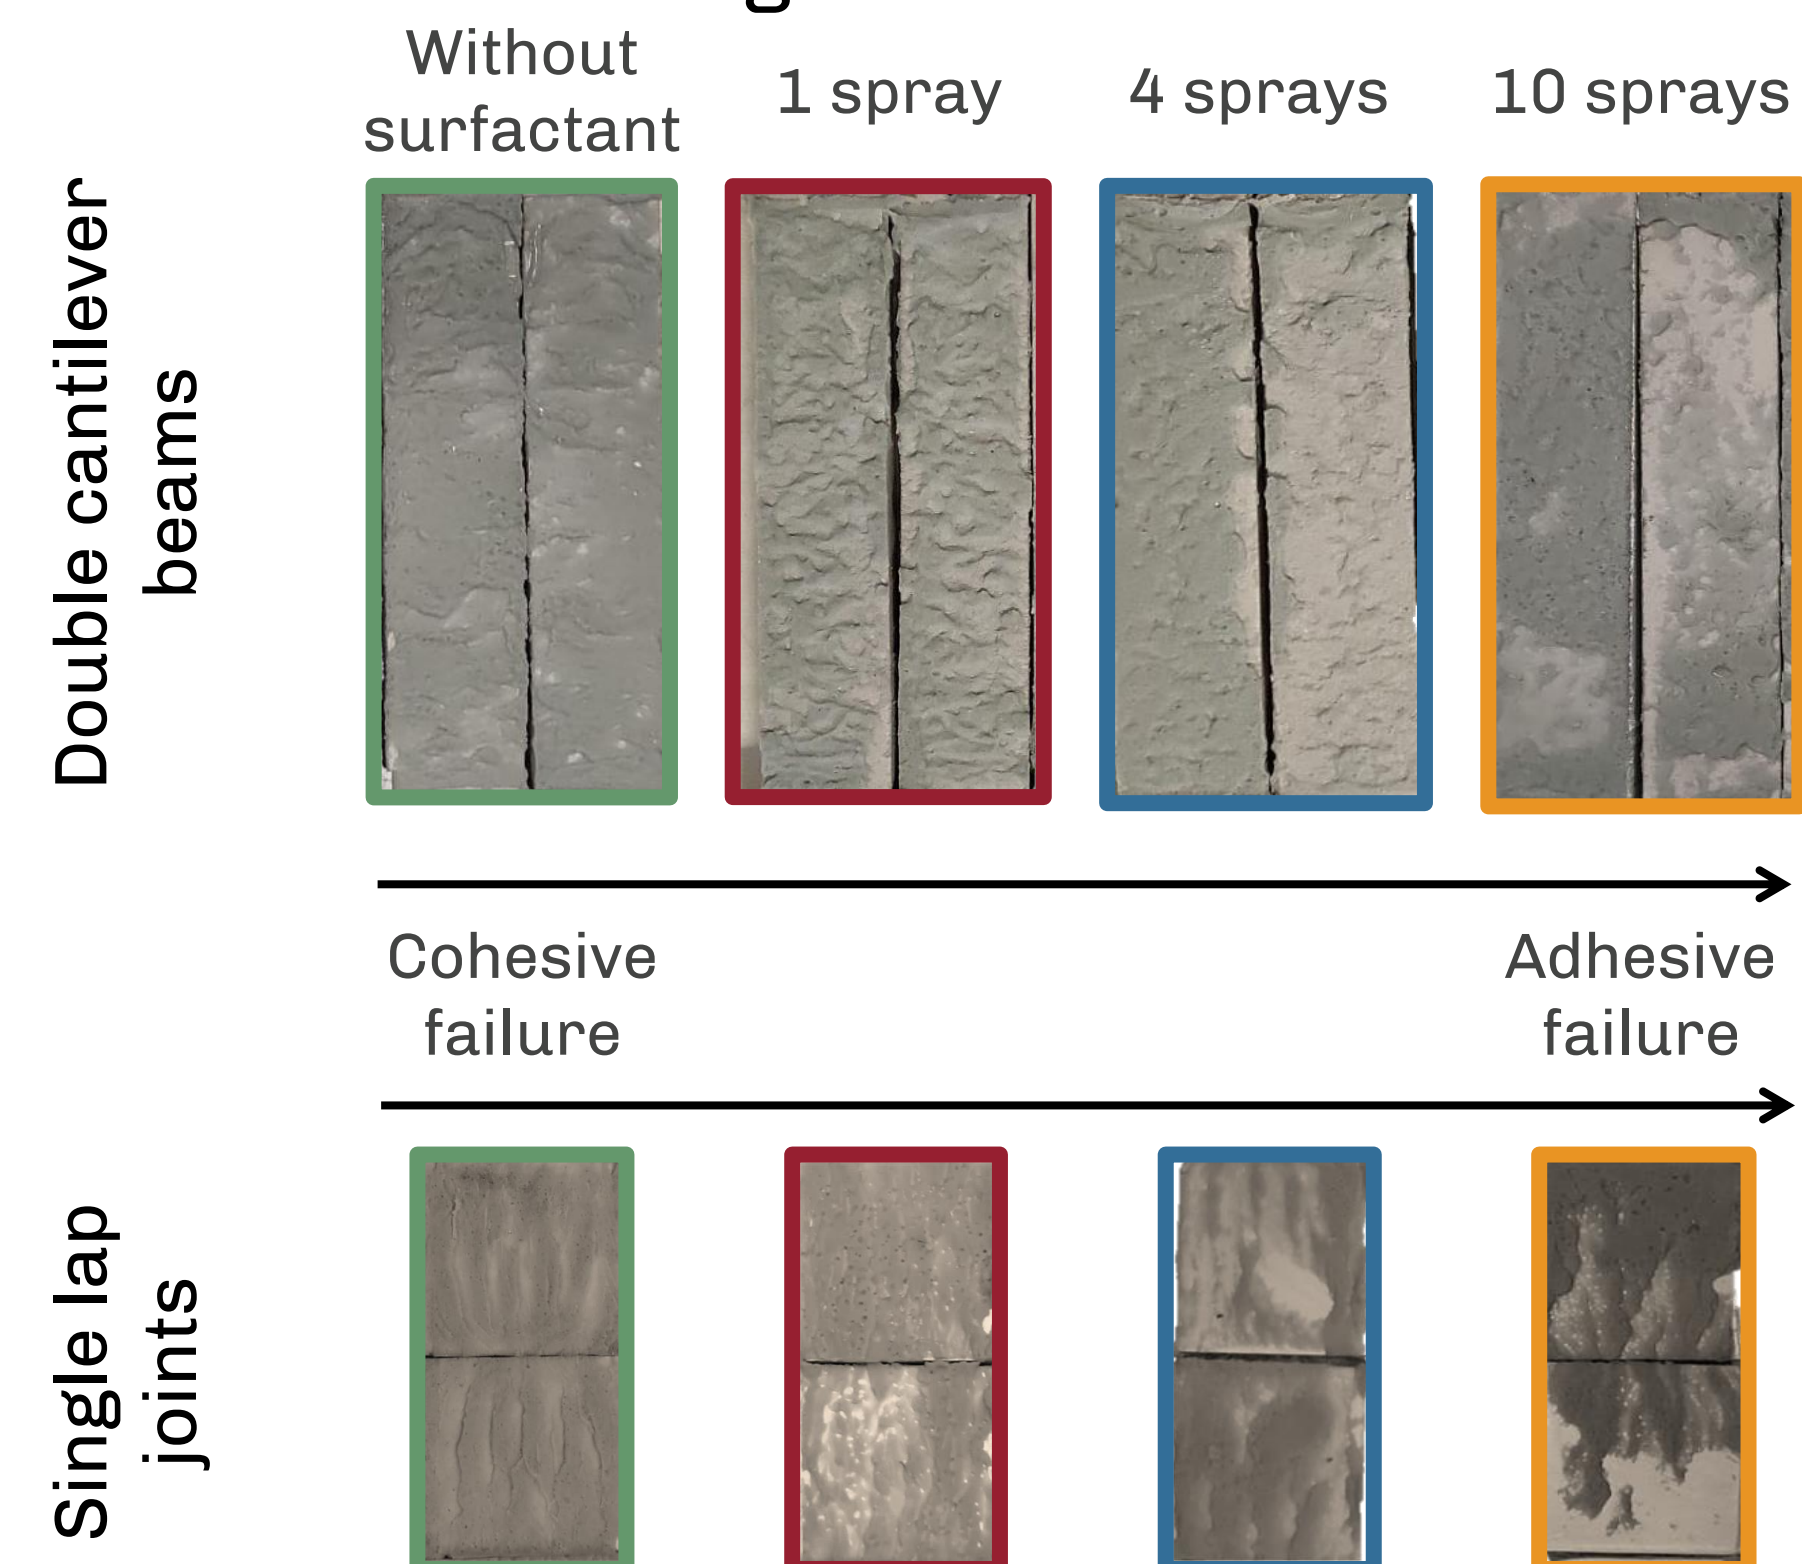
Fracture surfaces for each contaminant level tested, for SLJ and DCB.
